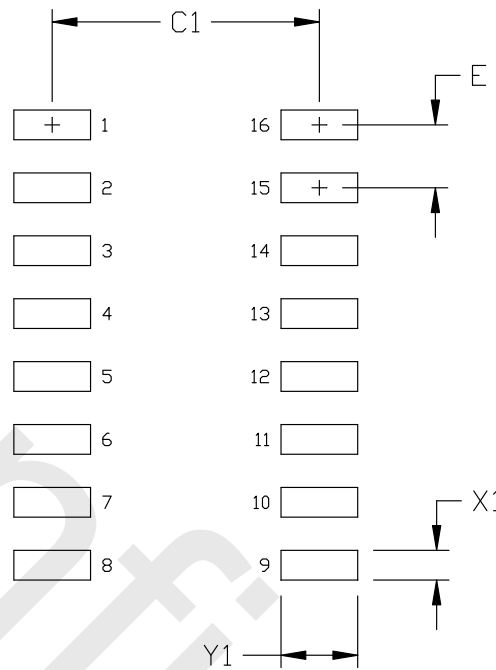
SOIC16 PCB Land Pattern Drawing
